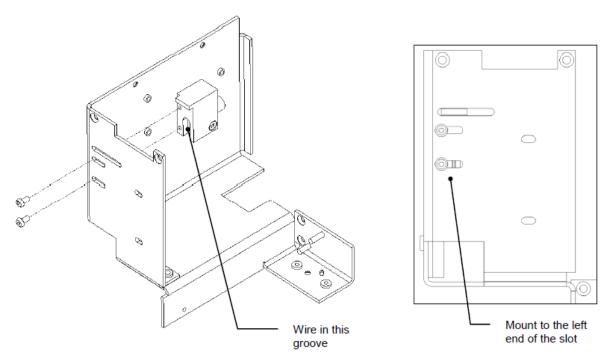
Removing and Replacing the Laser Mounting Assembly
